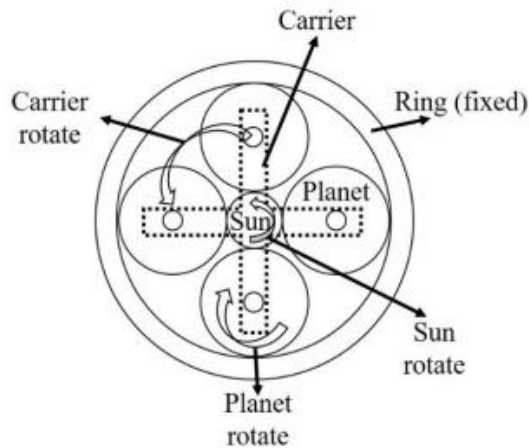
Planetary gearbox including four planet gears with the ring gear fixed
